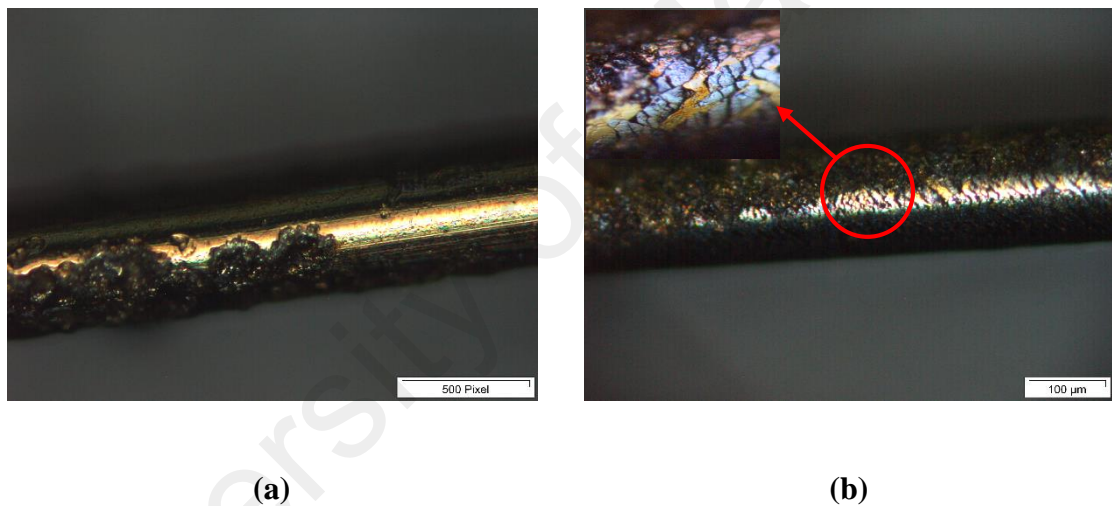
Optical microscope sample of wire rupture after machining for (a) Brass wire (b) Coated wire
